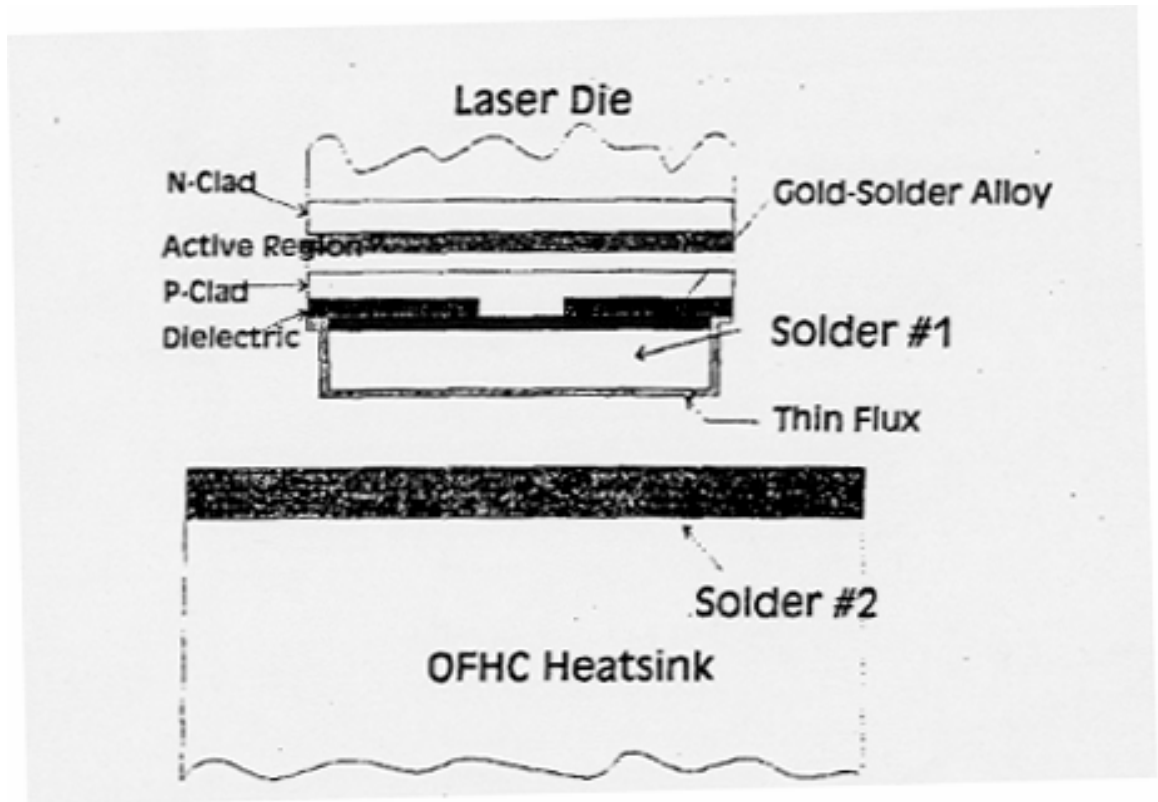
Laser Die Attachment to an OFHC Copper heat sink using solder #1 (Indium) and solder No. 2 (Tin); this technique produces high reliability laser die attachments due to lack of voids on the laser die epitaxy side. [Merritt]
